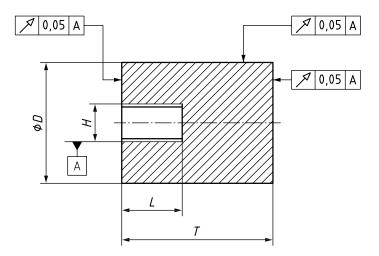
Geometrical dimensions and machining tolerances for type 1 straight test wheel
